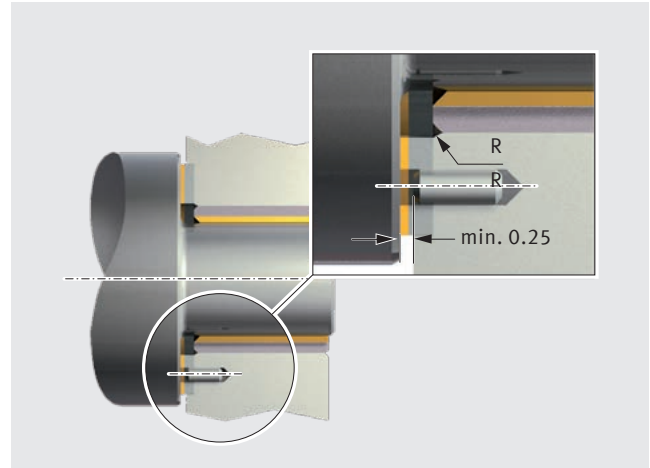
Attaching a PAW thrust washer in a recess in the housing
